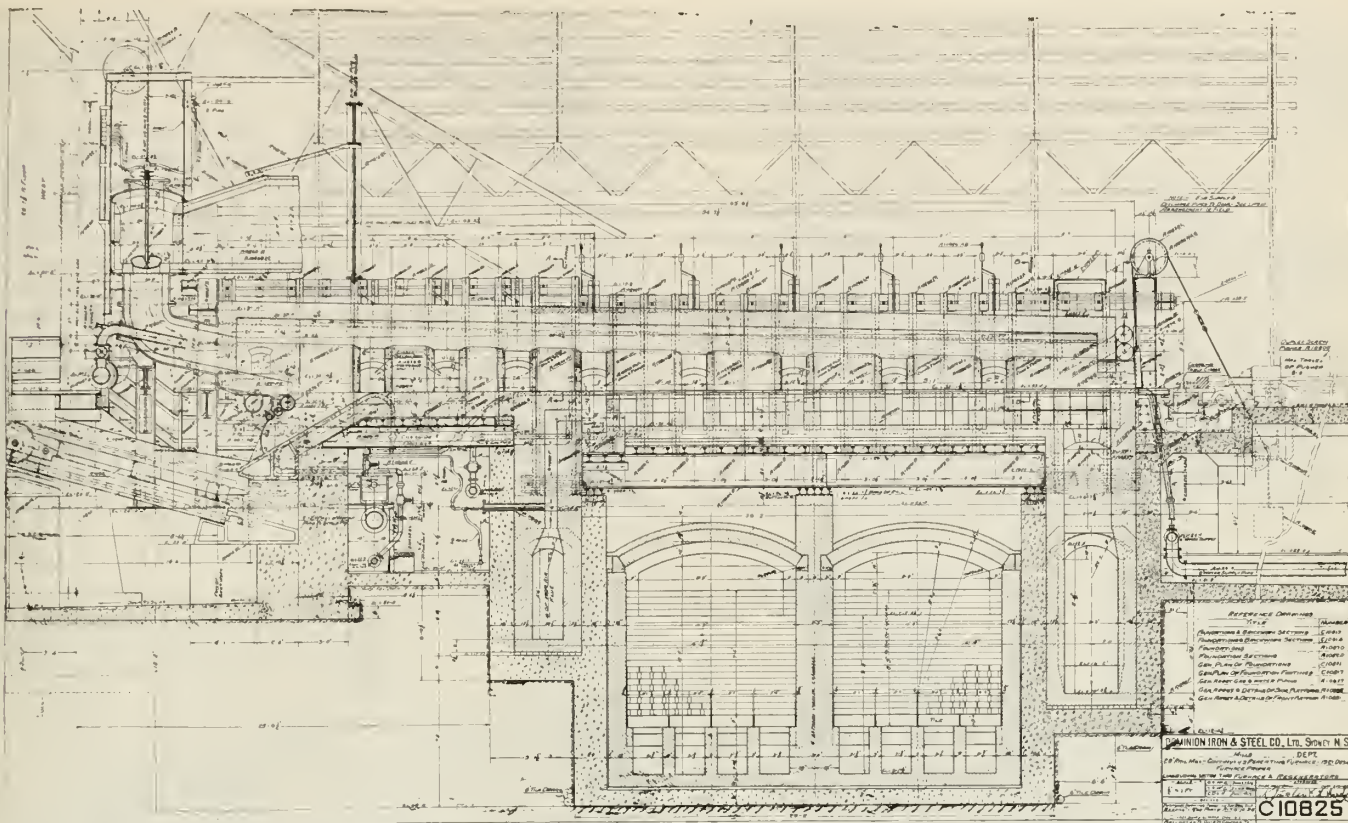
,—Longitudinal Section through Furnace and Regenerators 28-inch Rail Mill—Continuous Re-heating Furnace—1921 Design.
